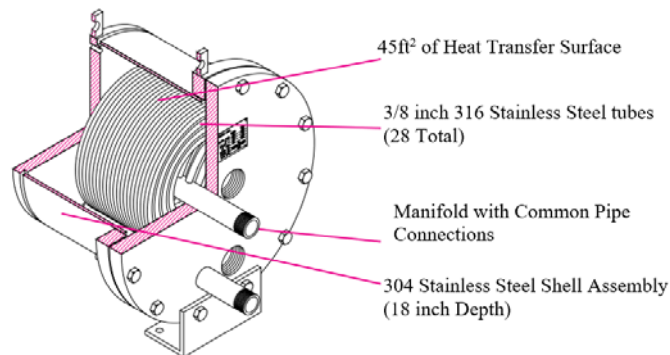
Cross-Section of a Spiral Tube Heat Exchanger. Adapted from Sentry Equipment (2015).
